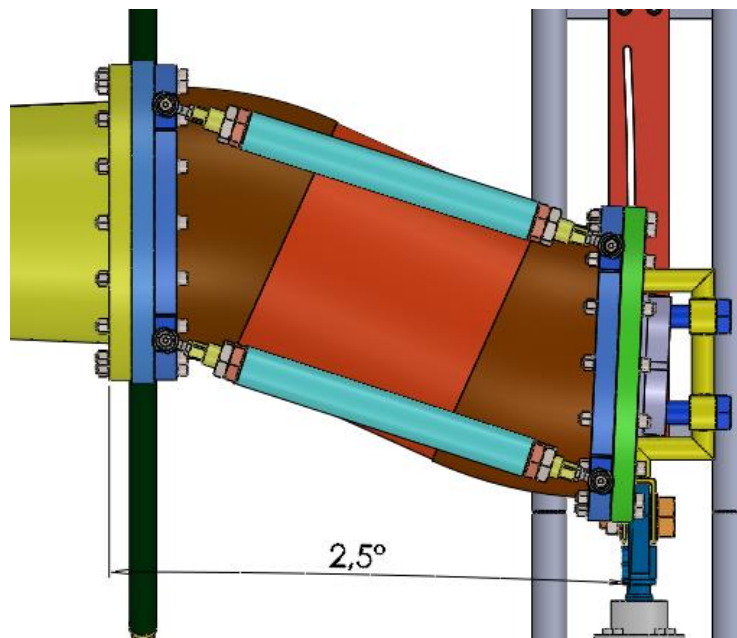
Upper view of deflected bellows weldment with slender struts
